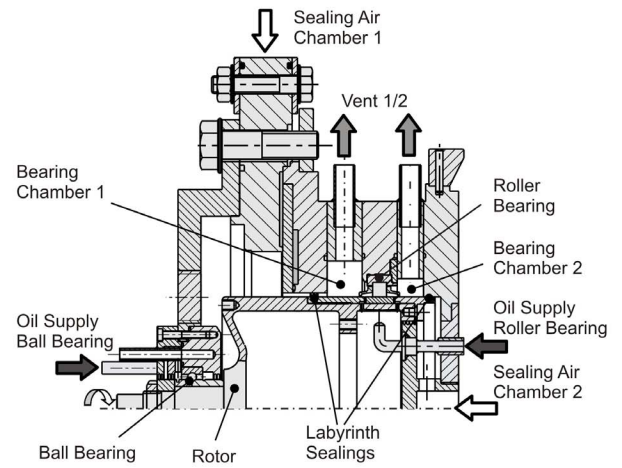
Co-axial section of high speed bearing chamber test rig (see [8])
